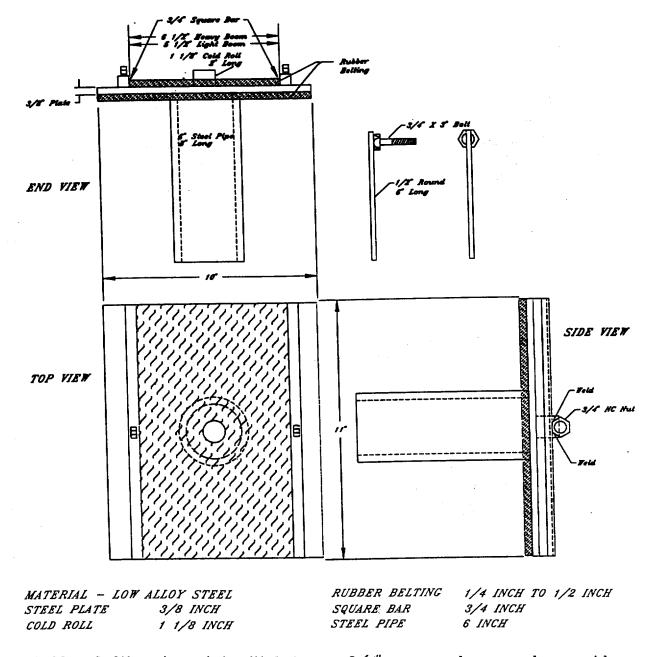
Dimensional Drawing for Fabricating Improvised Recoil Mechanism Exercising Bracket for Wreckers M543A2/M816
